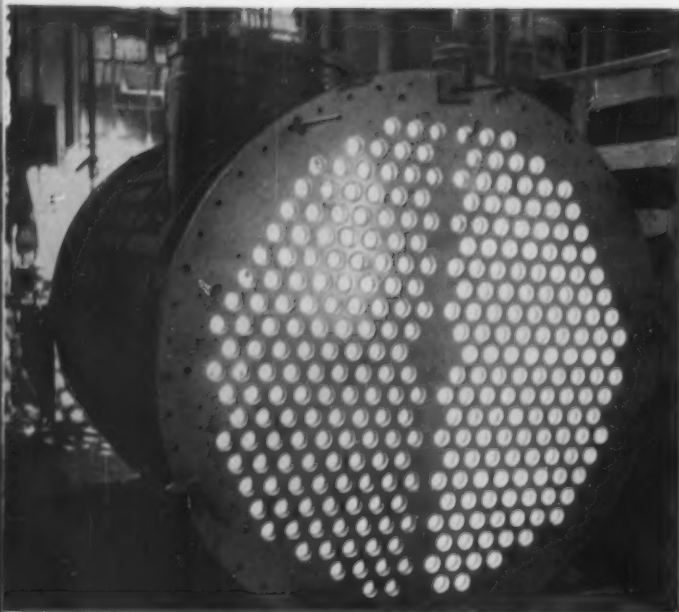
Fabricated multi-tube heat exchanger. Tubes are cemented into end plates
